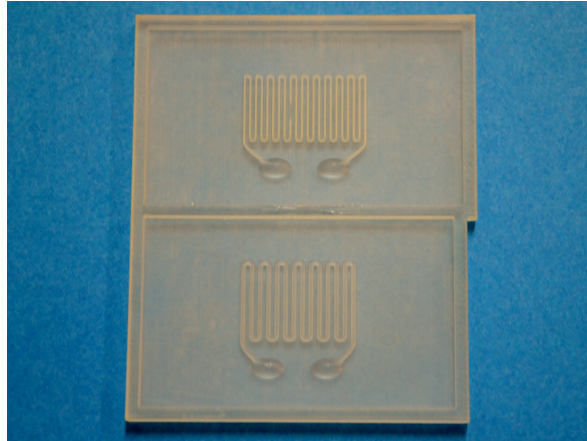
Molds for strain sensors printed with SLA Frosted Ultra Detail Plastic technology. The top mold matches the design shown in figure 3.5, and the bottom mold matches the design shown in figure 3.4.
